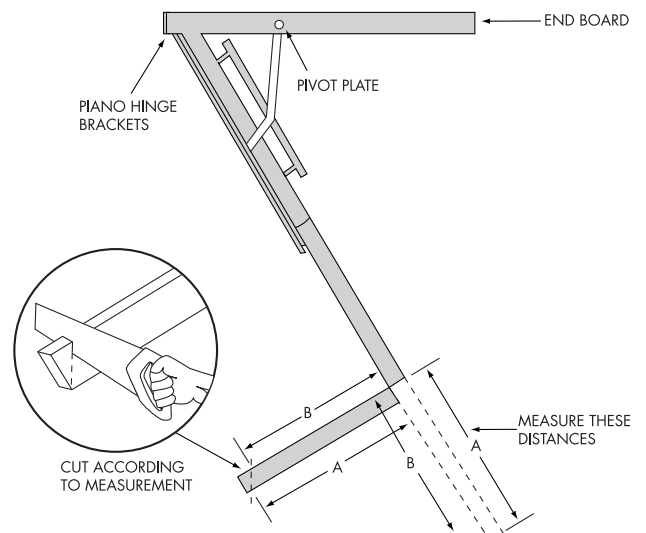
ADJUSTMENT TO CEILING HEIGHTS AND NAIL POSITIONS
